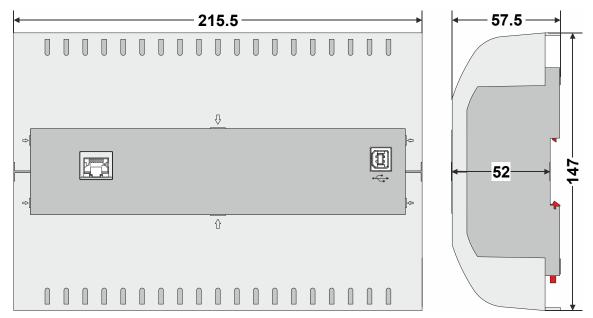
EAGLEHAWK NX controller with covers, dimensions (in mm)
